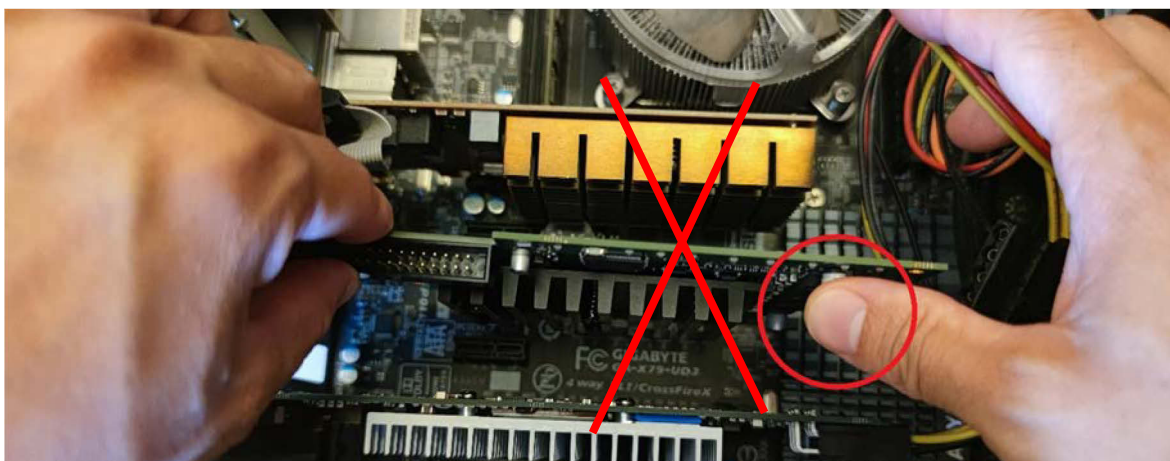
How Not to Touch the Electrical Components While Inserting Frame Grabbers and Interface Cards
